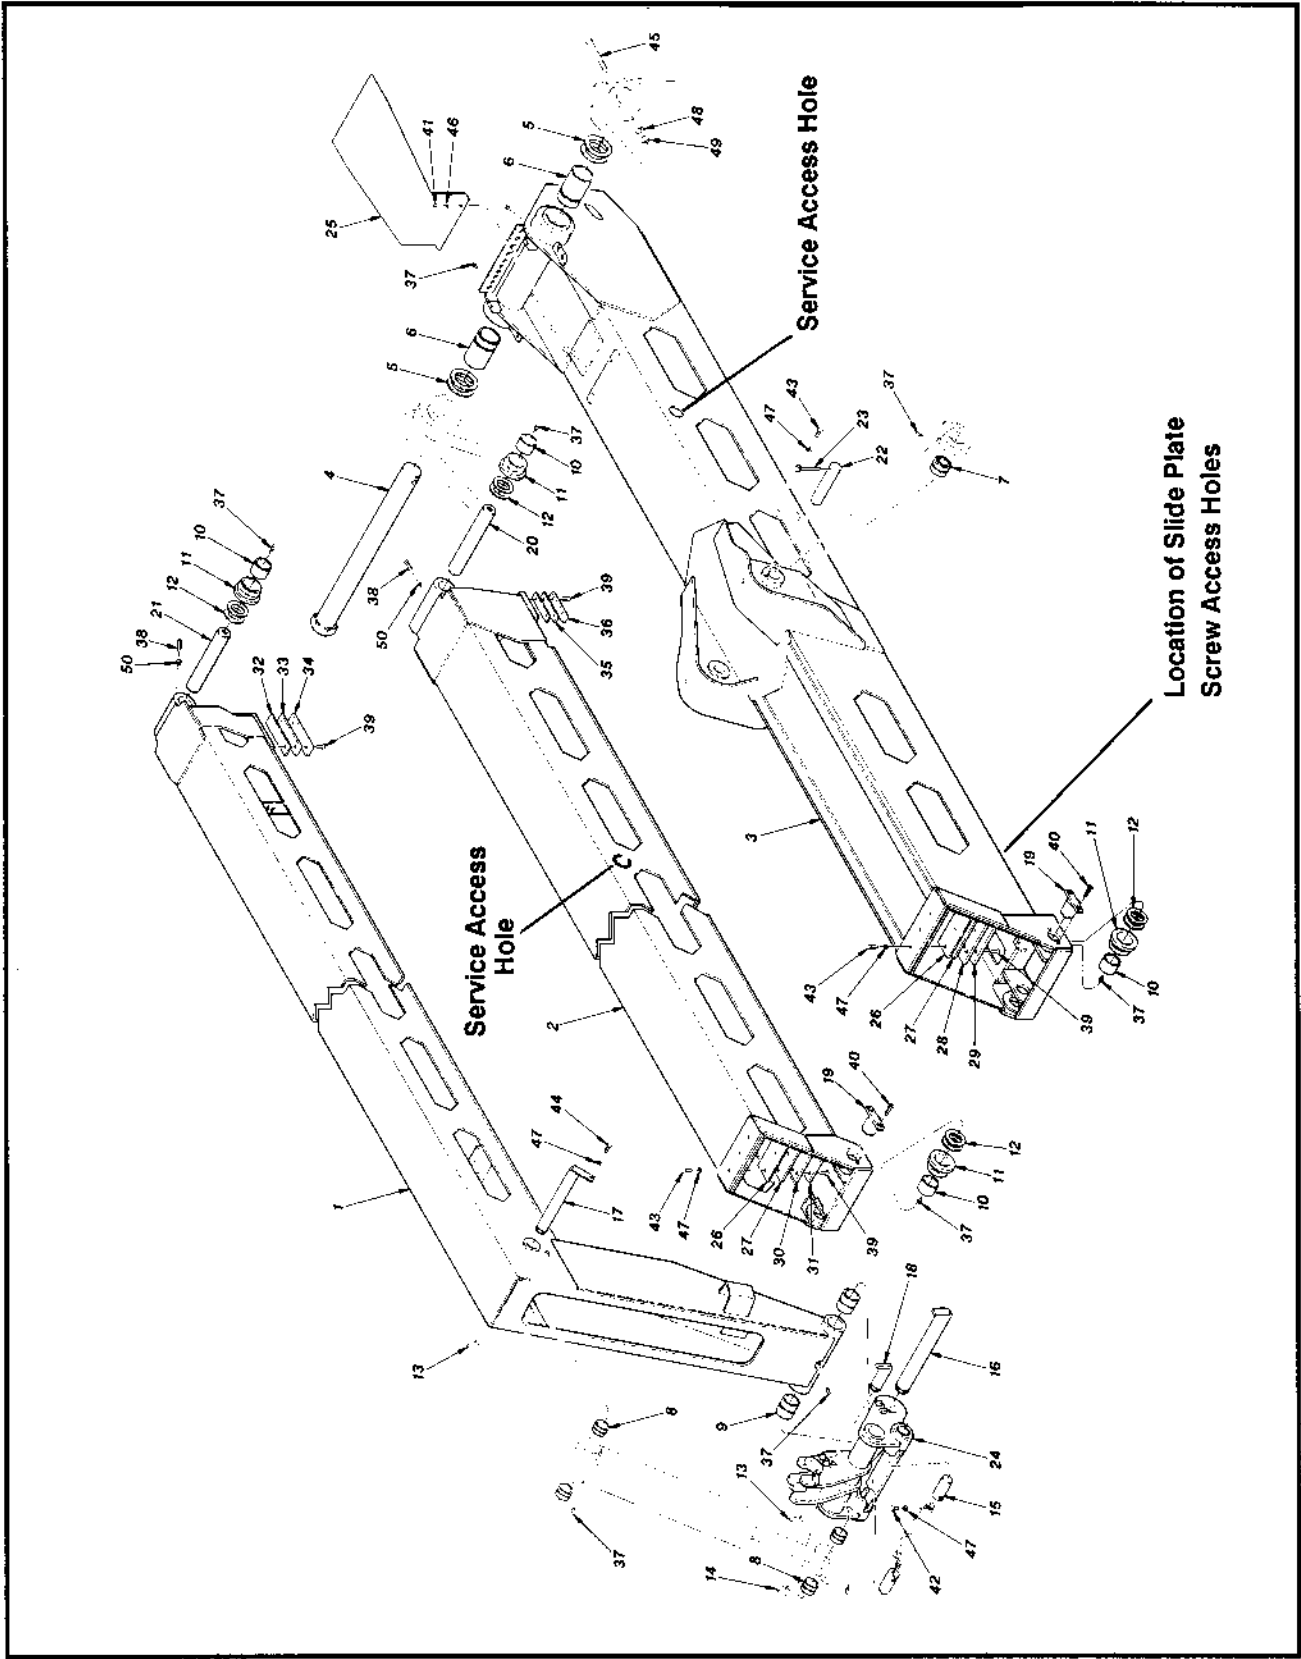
Rollers, Slide Plates, Shims and Bushings Removal
